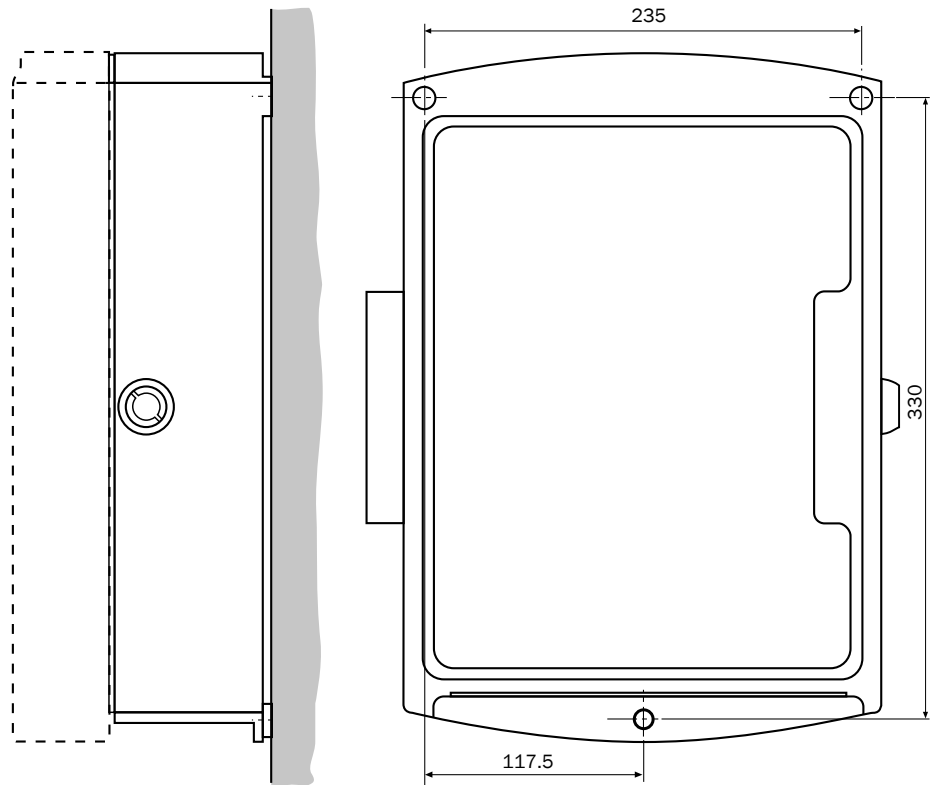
Fitting the control unit AWE, cast metal enclosure (dimensions in mm)
